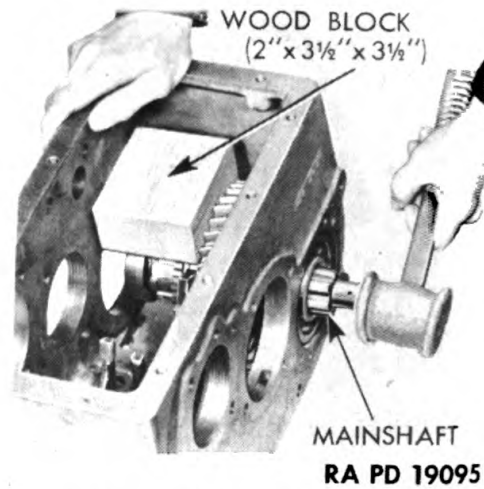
Removing Under-Drive Gear and Clutch Collar
